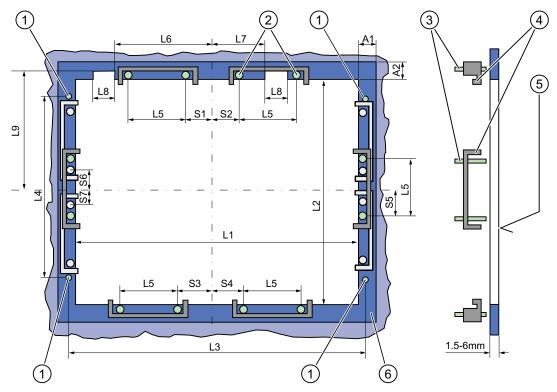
Drill holes for the screws and pressure points for the clamp screws
